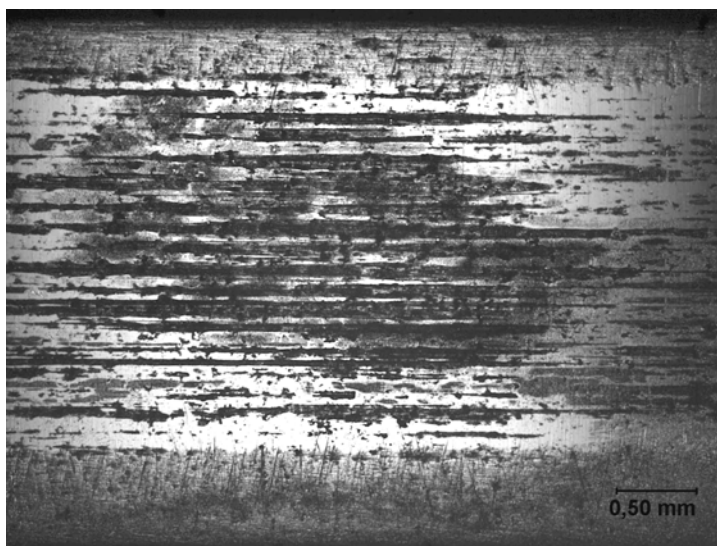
View of working surface of ring 6/1 (seat 6; standard) after assembly durability test
